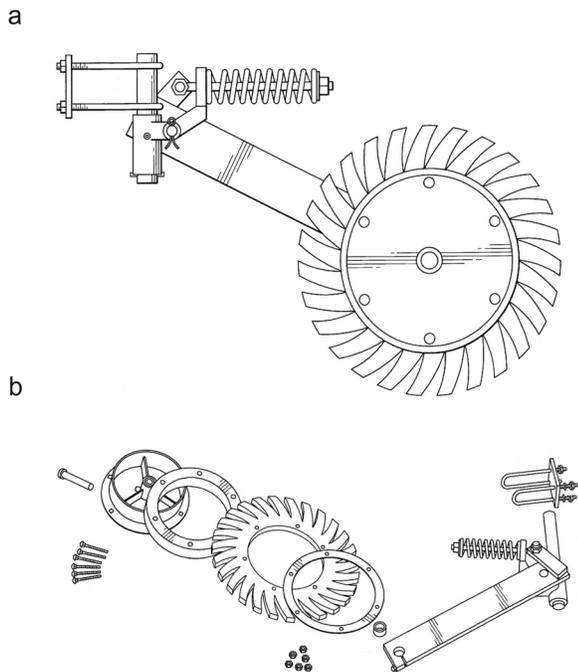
(a) Right side view and (b) exploded left side view of residue management wheel assembly (U.S. patent 6,345,671).
